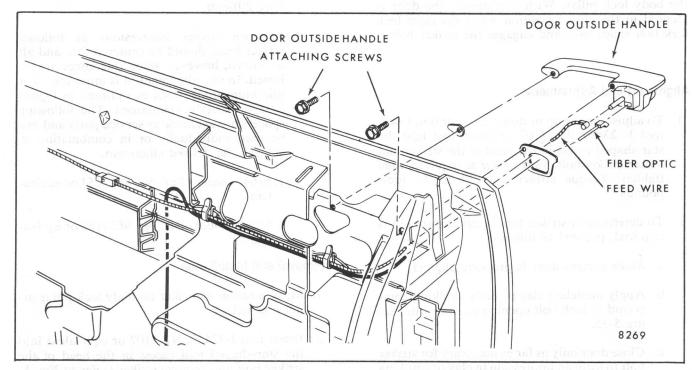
Illuminated Door Handle - "B and C" Styles
